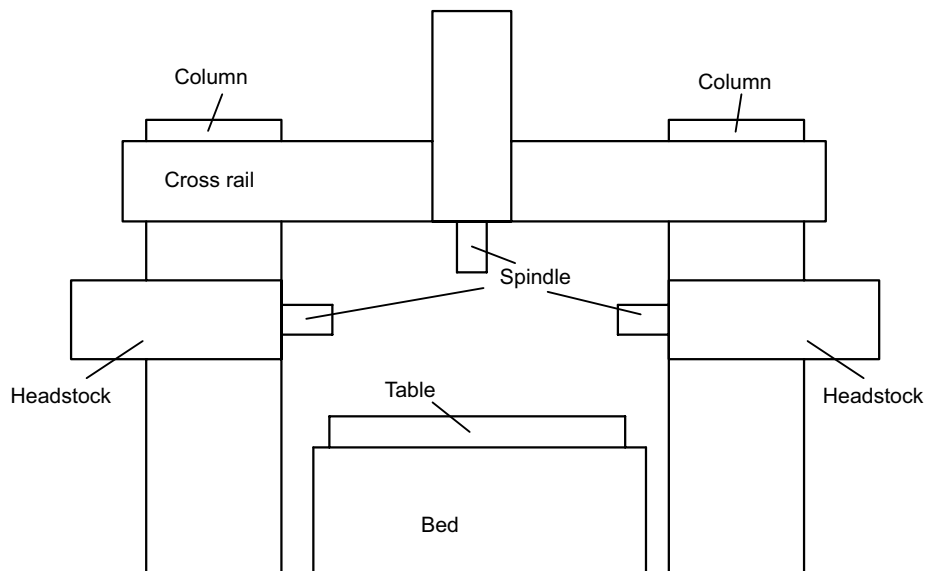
Schematic of a floor-type Horizontal Boring machine
